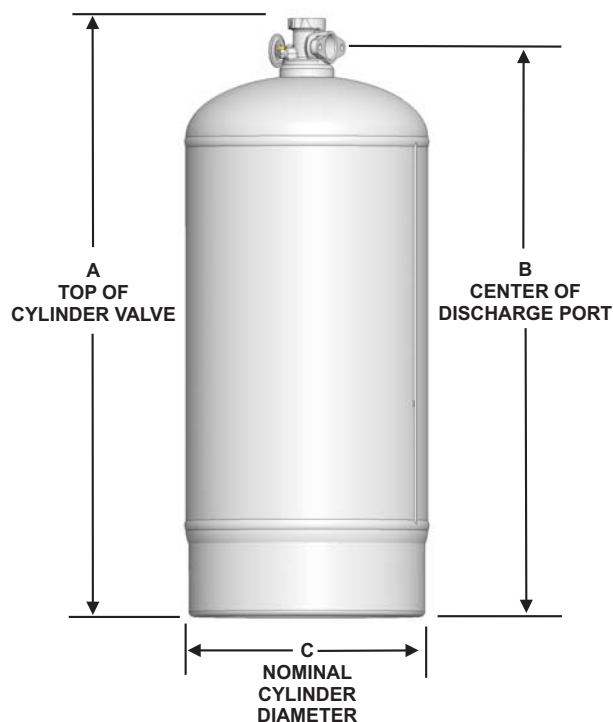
Dimensions of Cylinder and Valve Assembly
